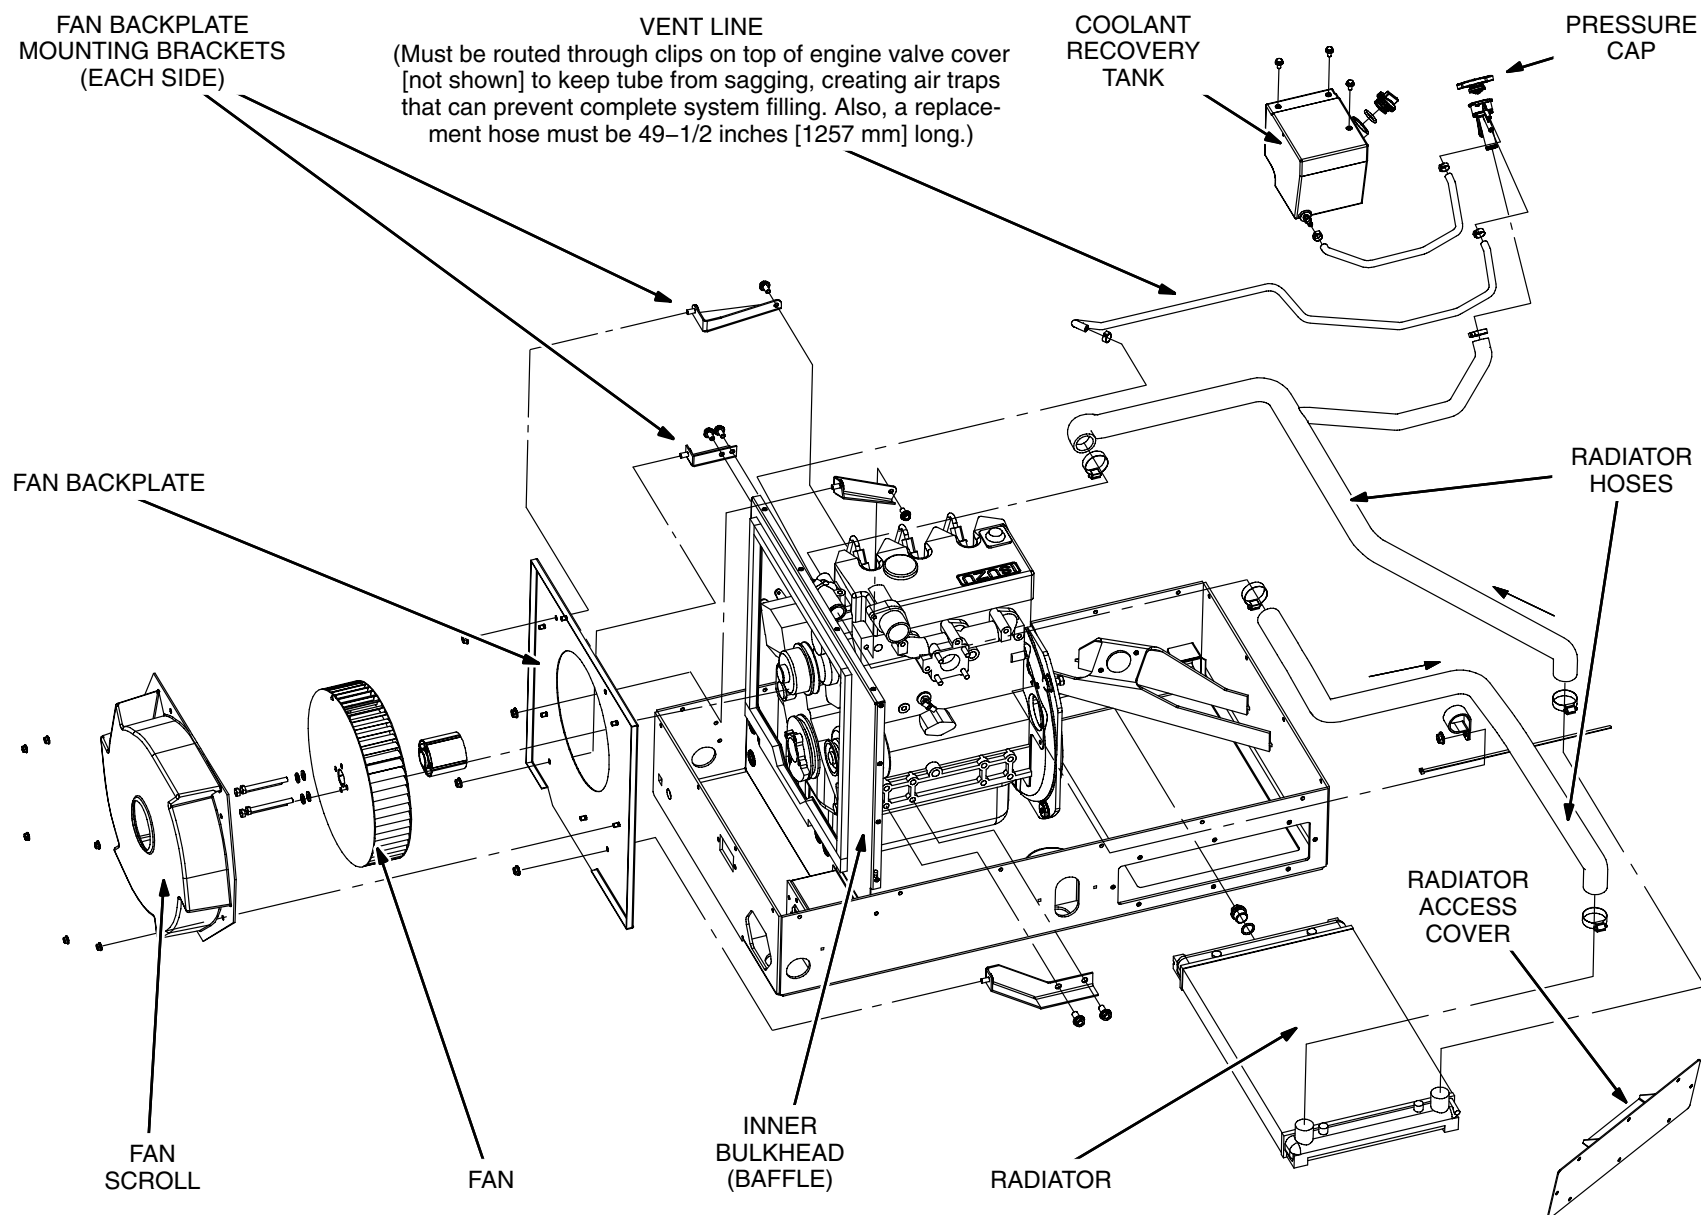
ENGINE COOLING SYSTEM (PRIOR TO SPEC C)
